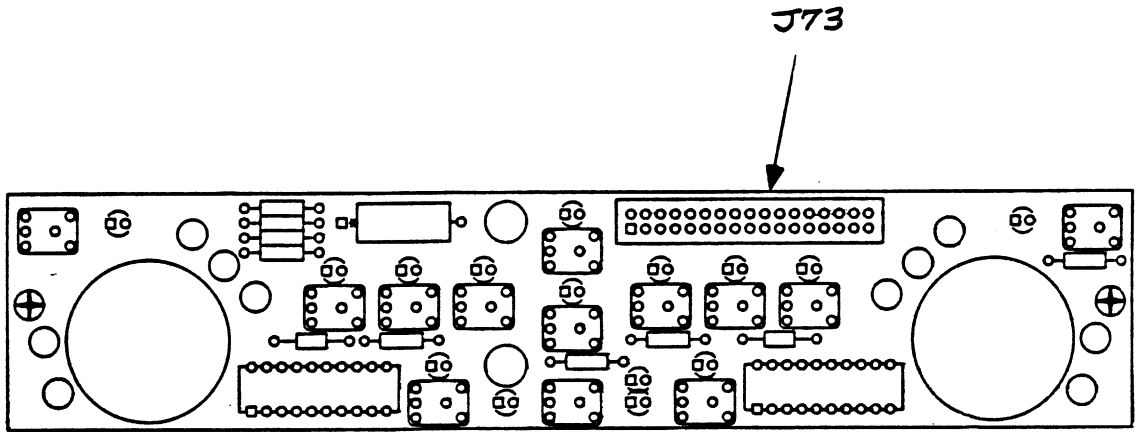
Connector location for the removal of the A5A5 Bottom Front Panel Board.
